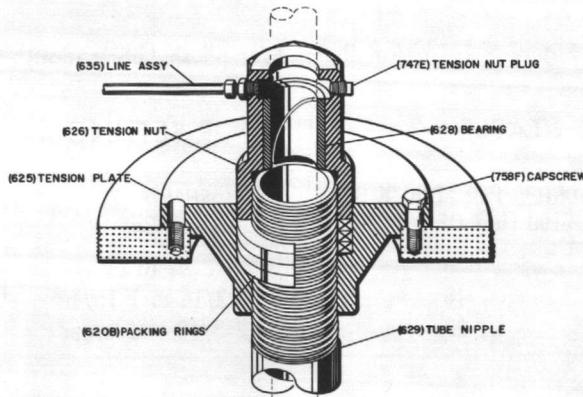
Tension Plate Assy (Drip Feed Lubrication)
